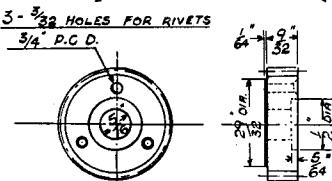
Planet wheel, 2 off cast steel; hardened 28 teeth, 26 D.P. O.D. = 1.154-in. P.D. 1.077-in.
